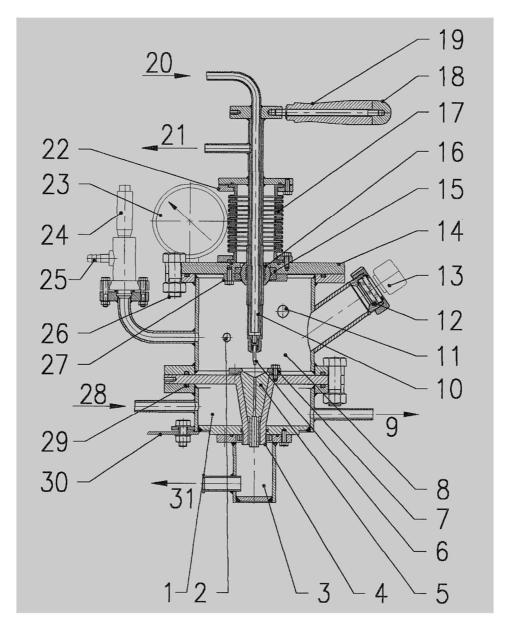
The design of the arc furnace with an suction attachment composed of cooler (1), crucible housing (3) equipped with the vacuum outlet (31), cold crucible (4), divided cold crucible (5) and clamp ring (7), all fixed to the melting chamber (8)
